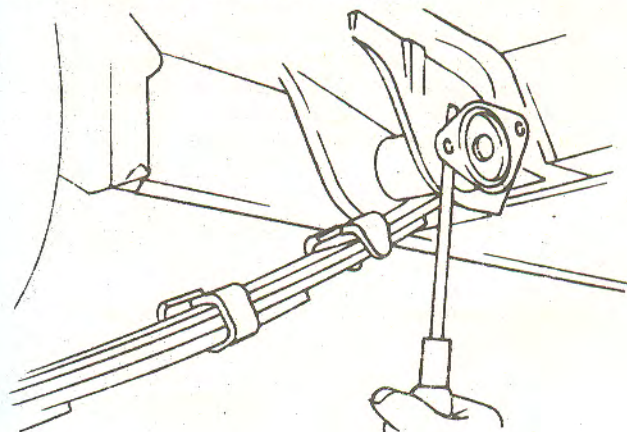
Removal of the front spring pin. A screwdriver is inserted as shown to pry out the pin.
